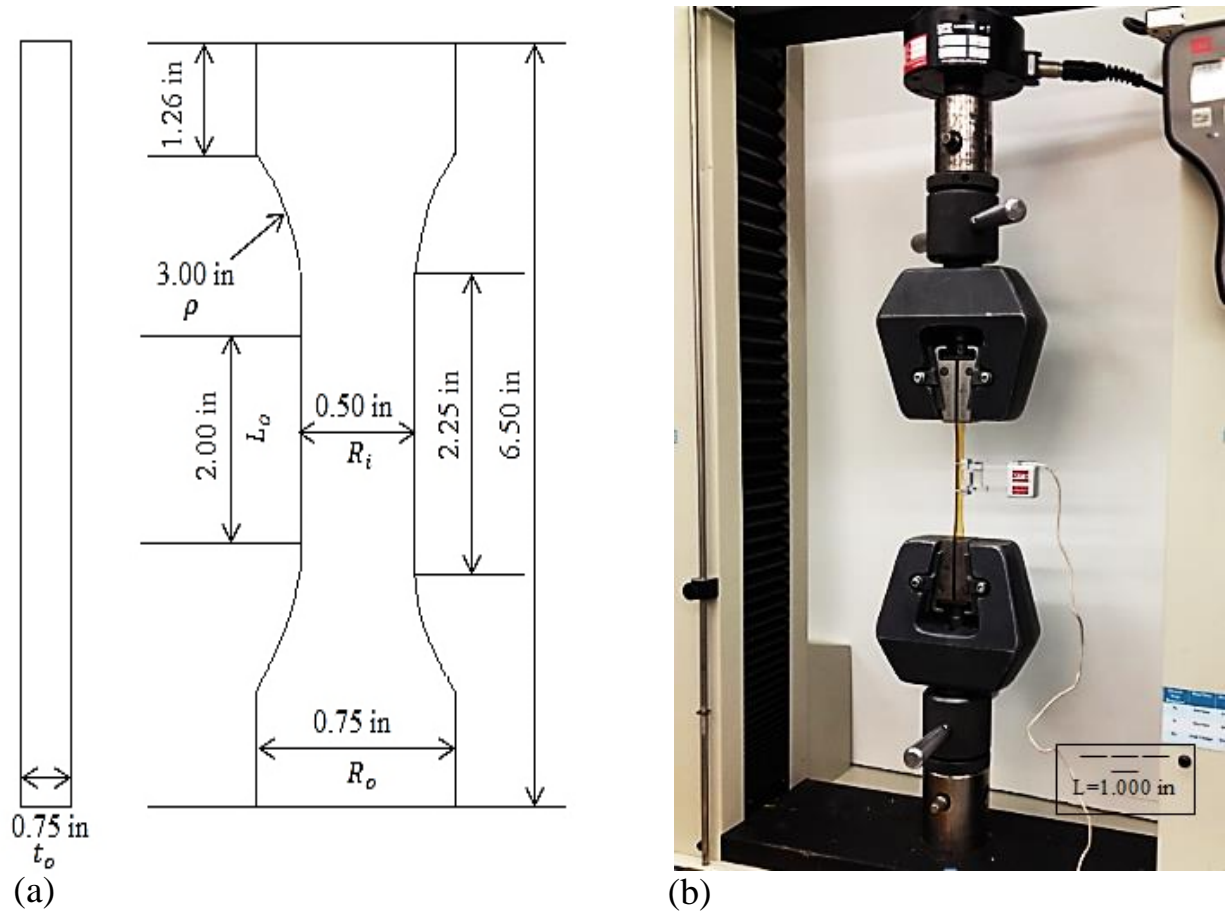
(a) Standard tensile sample with dimensions, and (b) universal test frame
